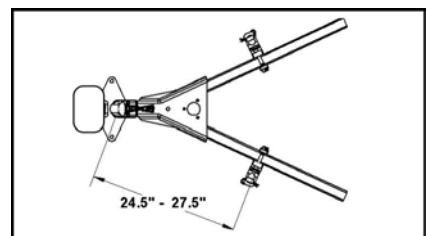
L brackets can be installed between 24-1/2" to 27-1/2".
